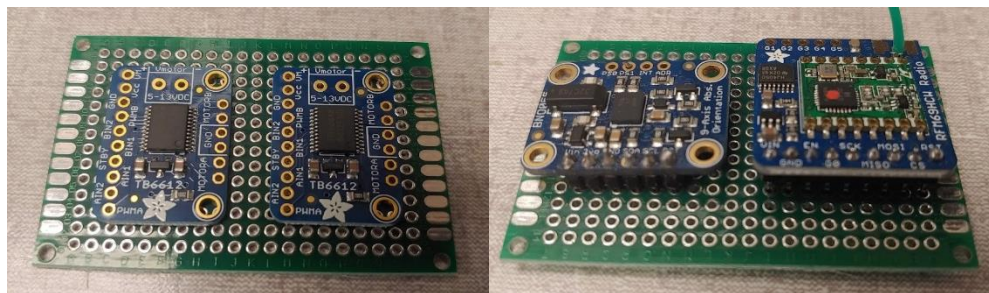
Breakout Boards for LOPSIDED-POS Wiring
